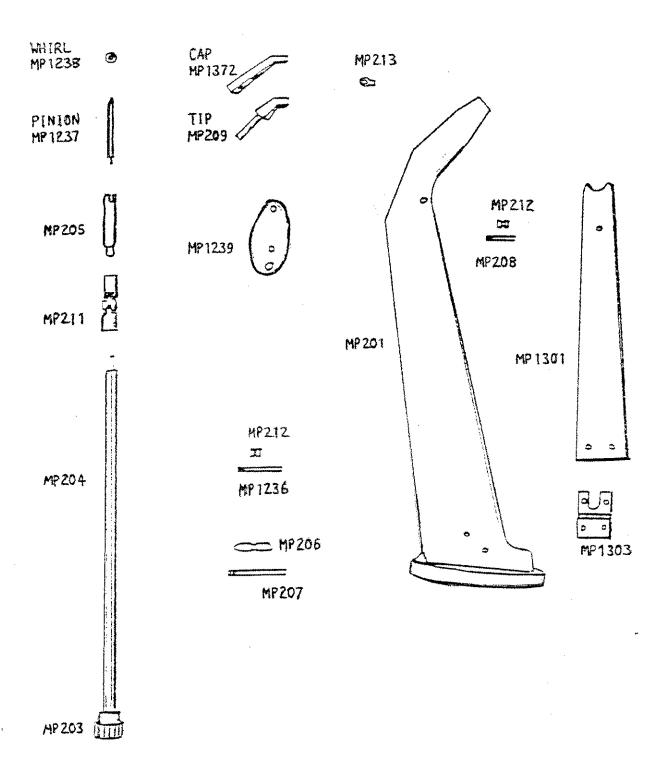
TAKE DOWN ASSEMBLY FRAME
